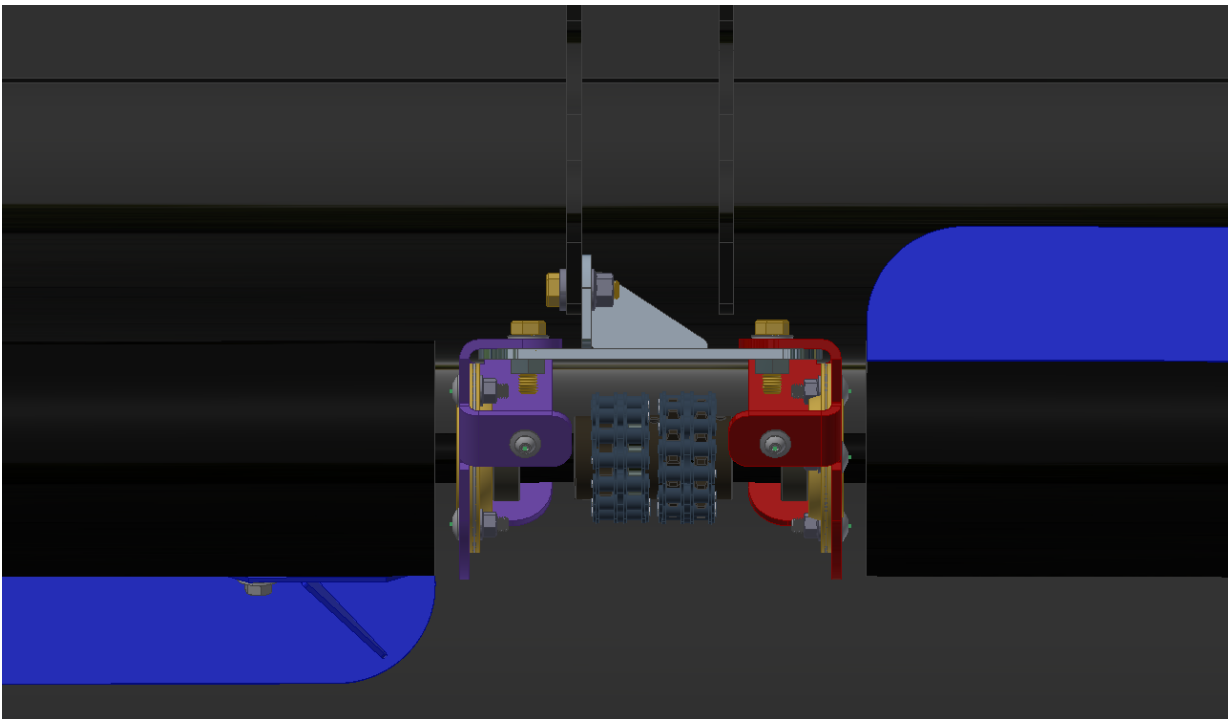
DUAL SPROCKET WITH CHAIN COUPLER INSTALLED ON RH AUGER
